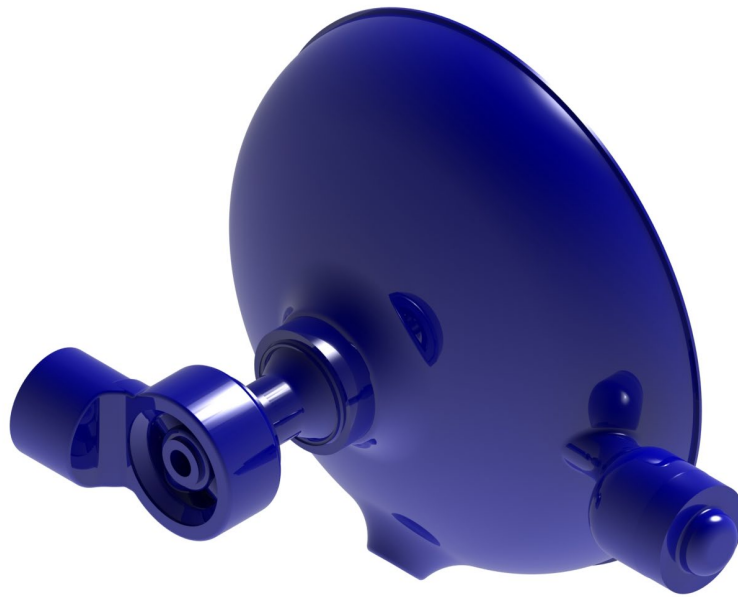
The surfaces extracted to form the cylinder head and associated DI system geometry.
